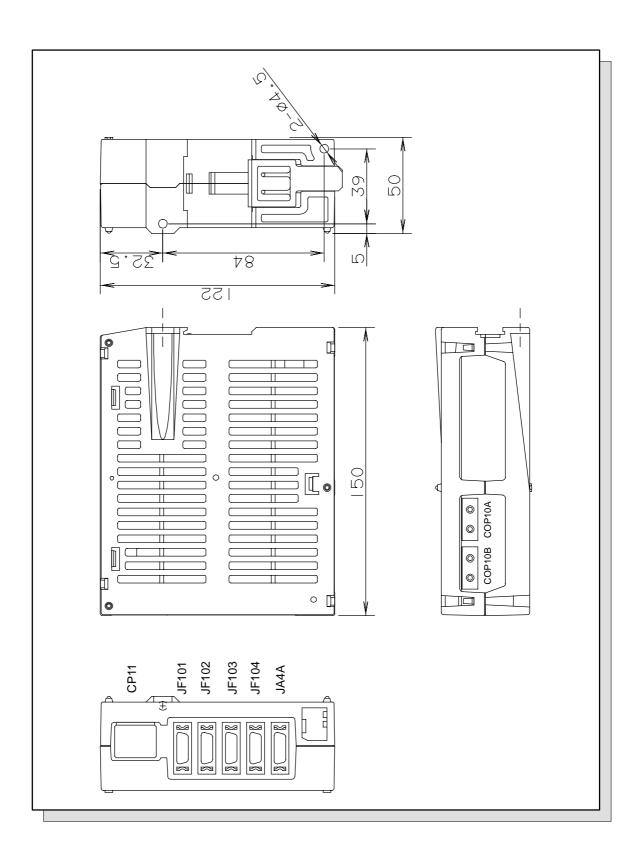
EXTERNAL DIMENSIONS OF TAP (FOR DNC1)
